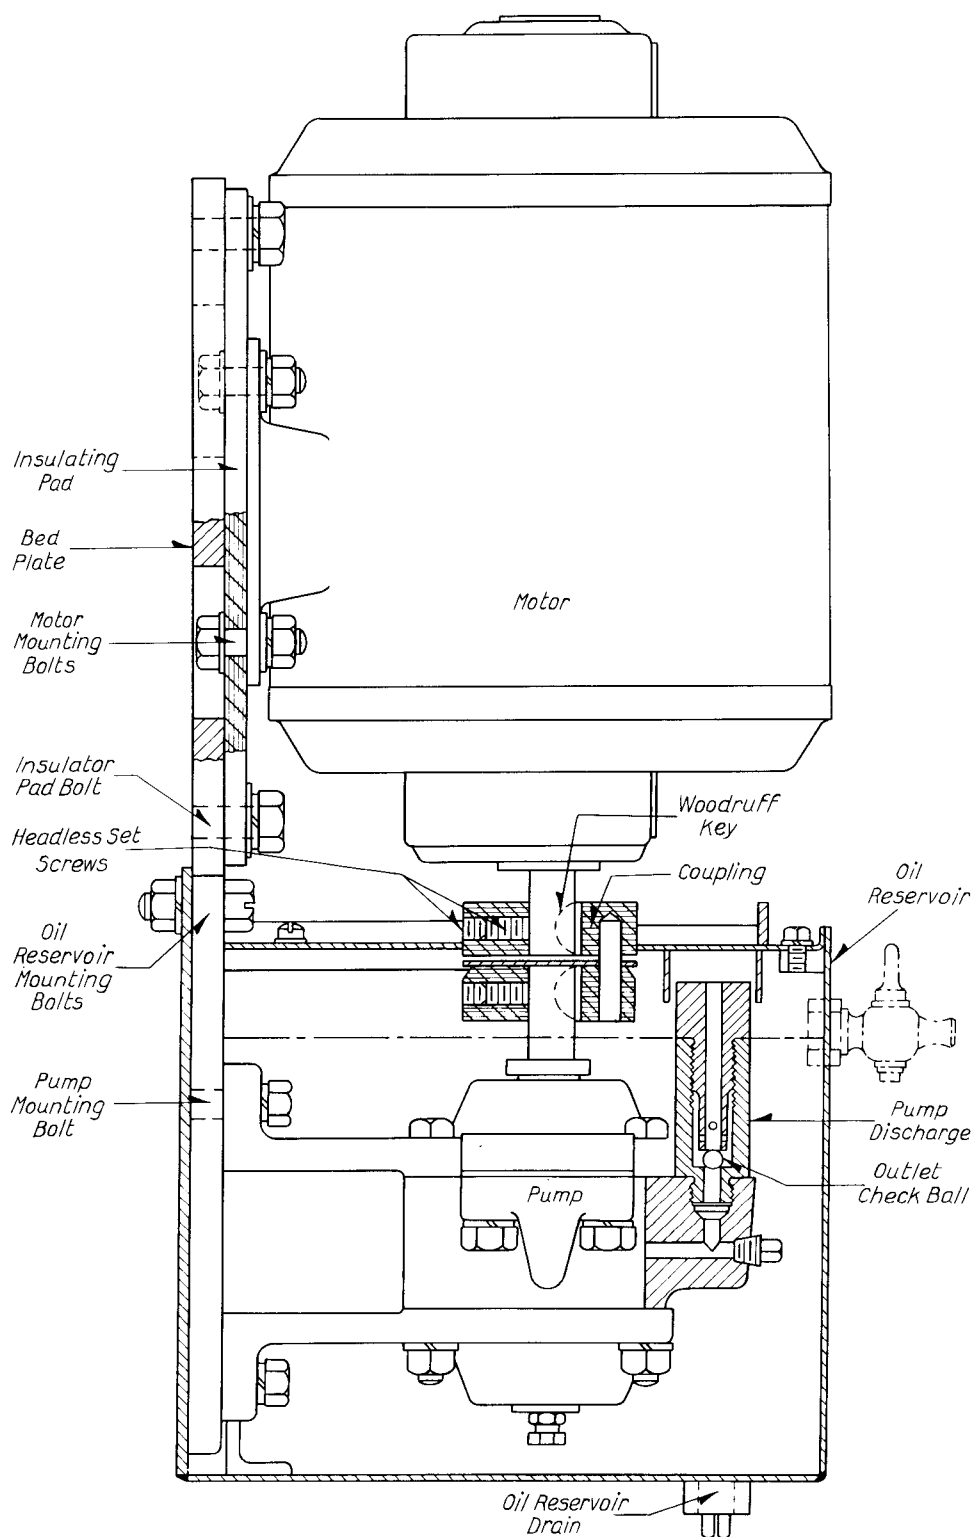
SIDE VIEW OF ROTARY OIL-SEALED VACUUM PUMP
